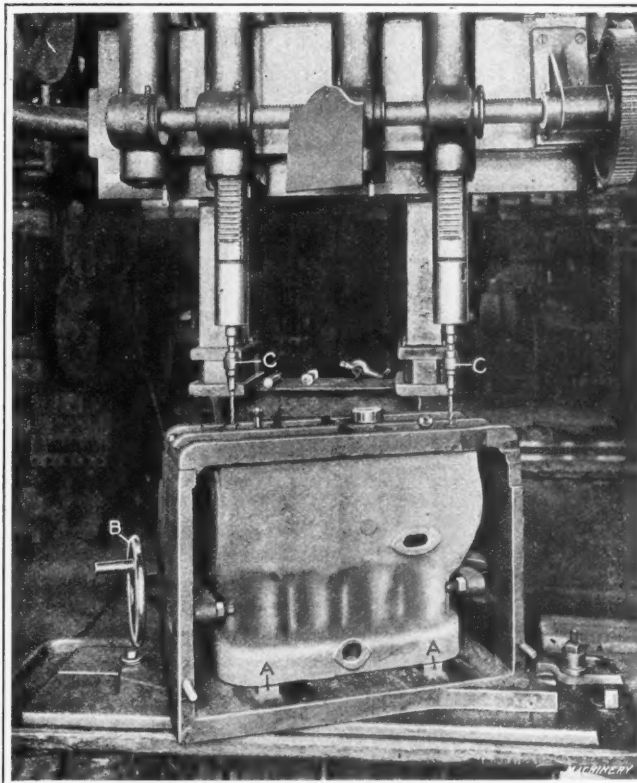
Two-spindle Foote-Burt Drill Press equipped with Quick-change Chucks and Tools for drilling and reaming Master Locating Holes in Base of Cylinder Blocks
